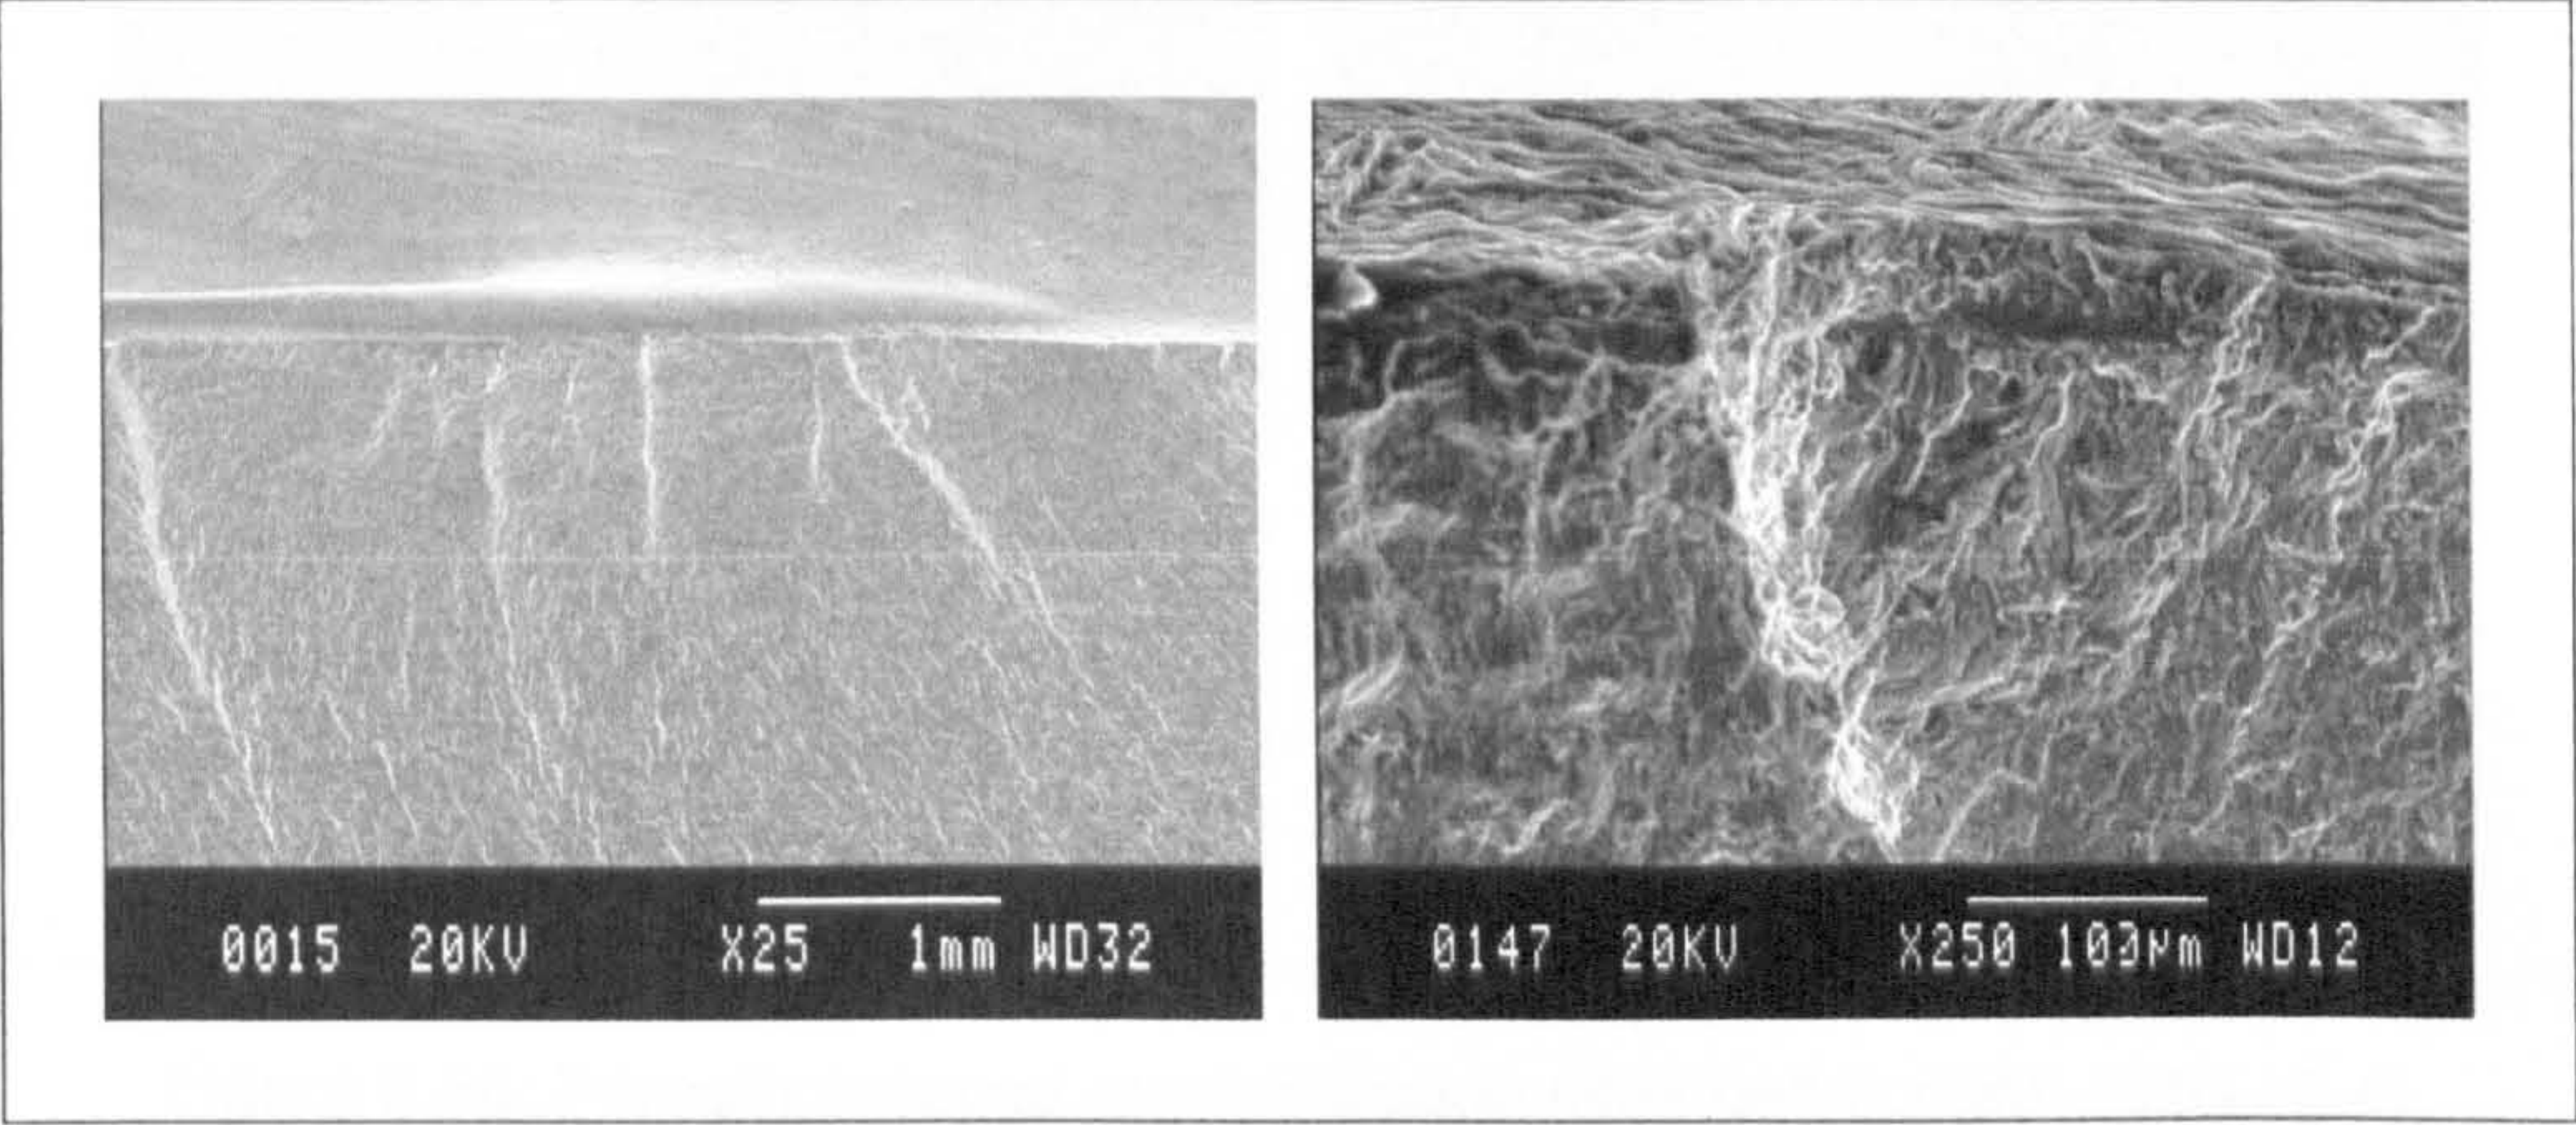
Fatigue crack initiation sites and coalescence (left & right) (MIG HI 2).
